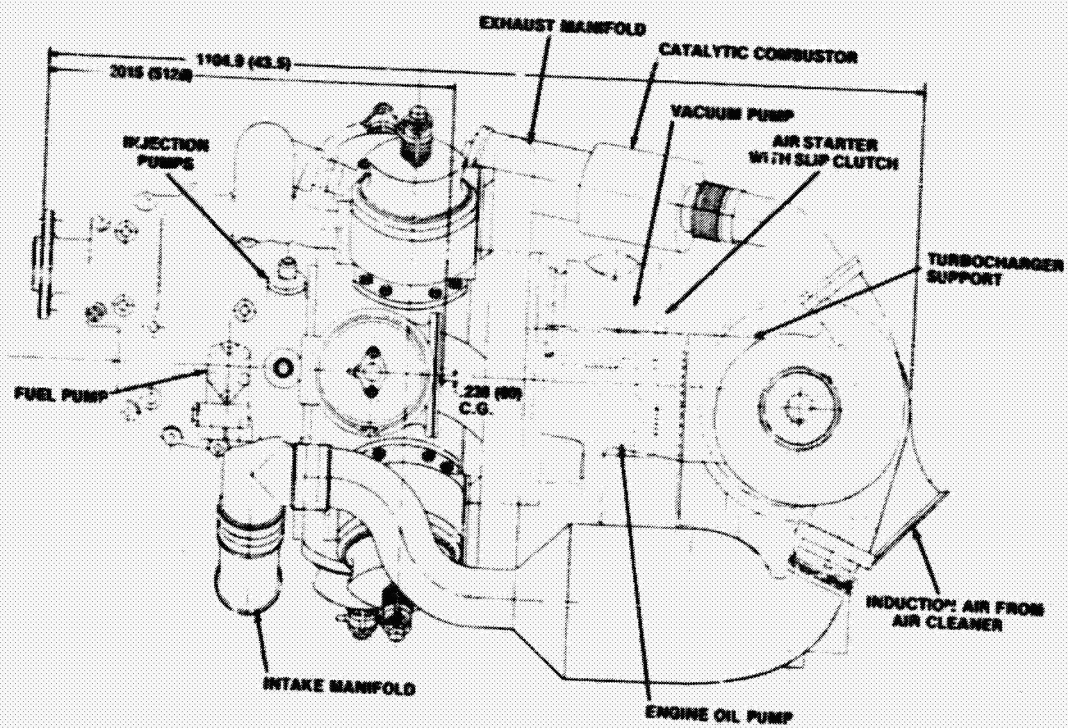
200 kW AIRCRAFT DIESEL—SIDE VIEW
